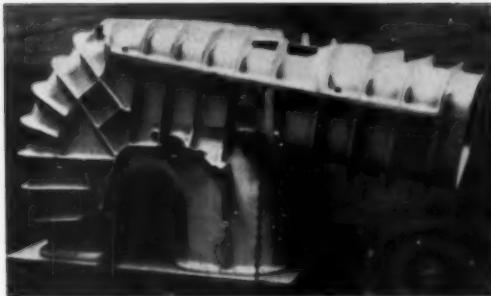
Oil Cooler Air Intake for a Reciprocating Aircraft Engine. Made up of four AZ 91 castings, it replaces a sheet metal assembly which suffered fatigue failures
